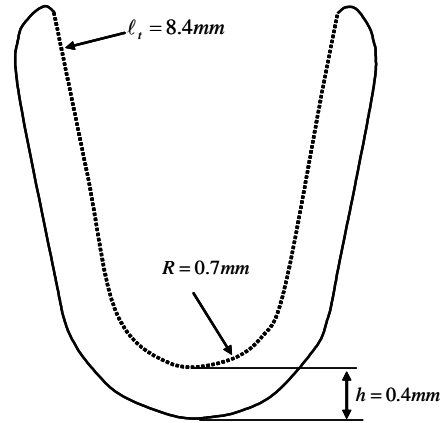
Dimension of terminal for AVSS2.0 wire model crimping
